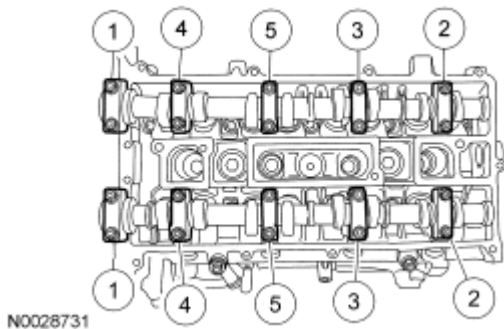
Identifying Loosening/Tightening Sequence Of Camshaft Bearing Bolts
